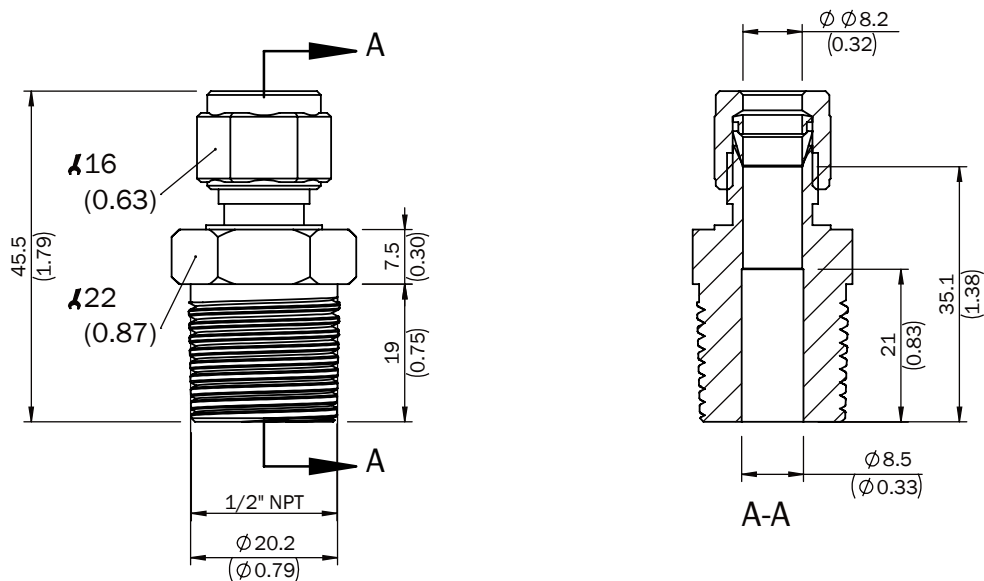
Dimensional drawing of 1/2" NPT adapter (P/N 5338775)
